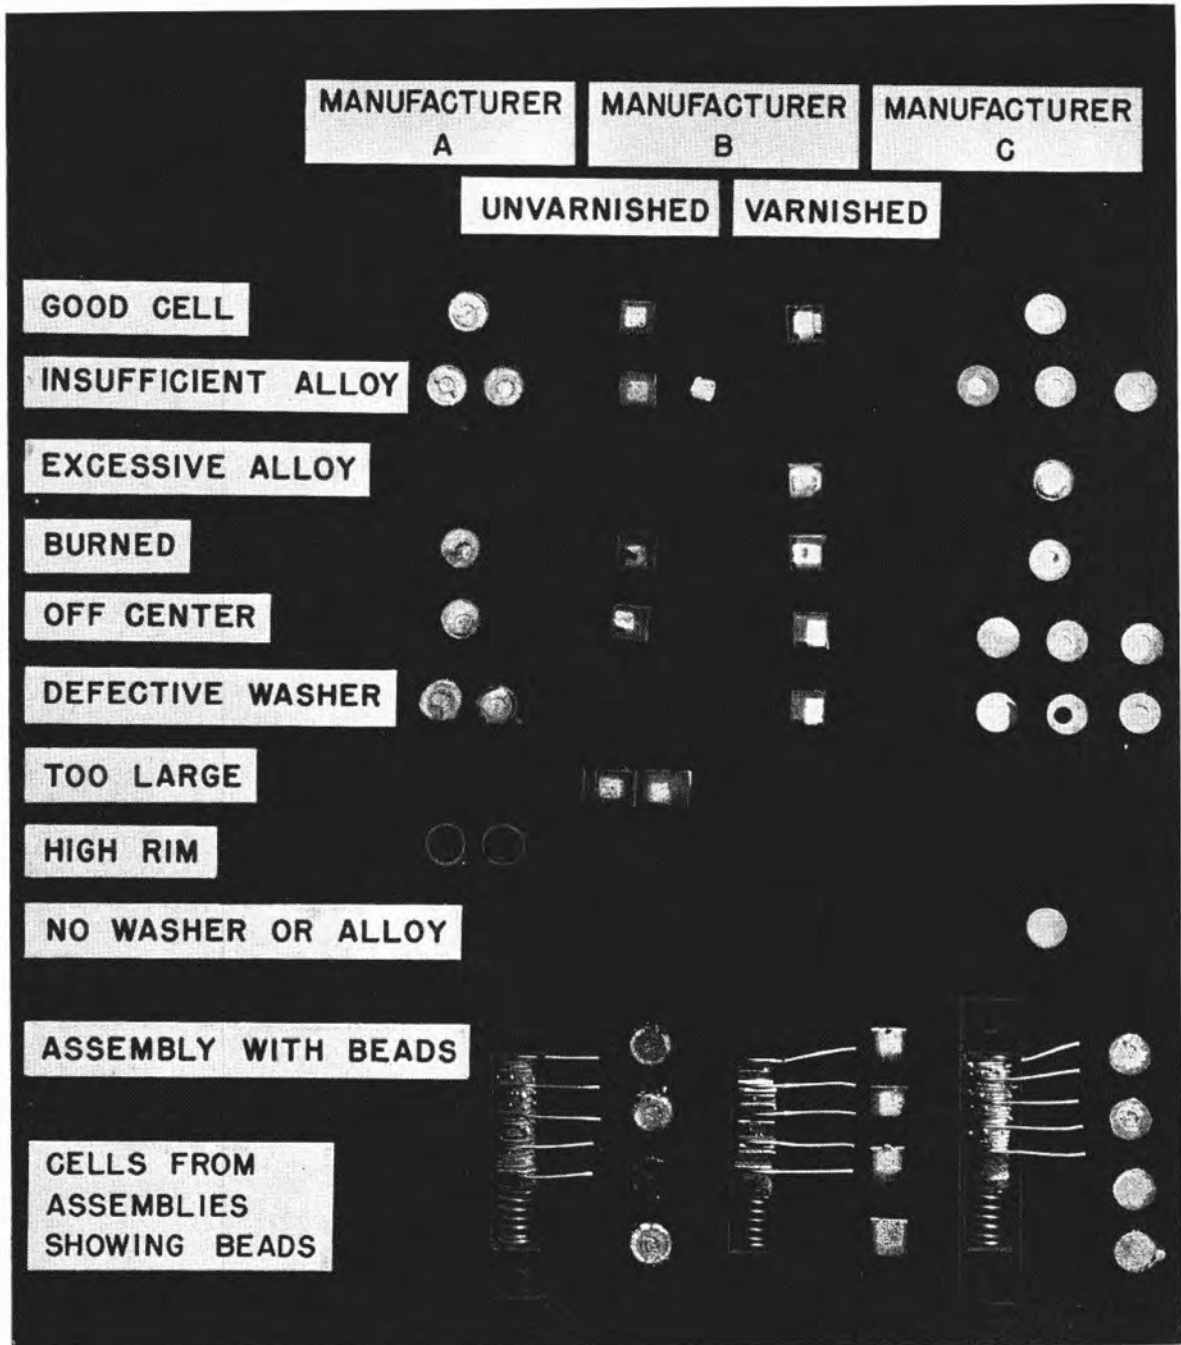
Typical defects in selenium rectifier disks from three different manufacturers.
